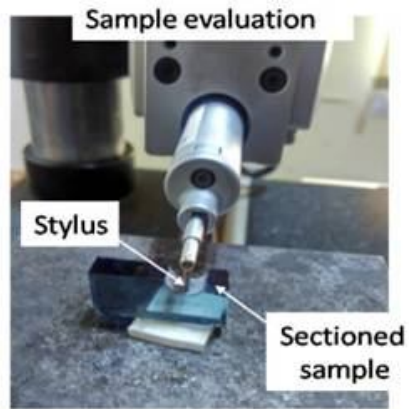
Illustration of the complete surface roughness tester including its parts
